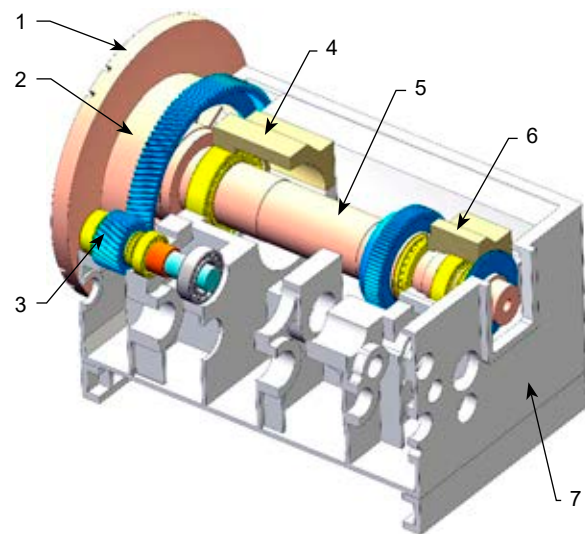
The headstock of HPL: 1 – chuck (rotary table in effect), 2 – chuck areas convenient for backing, 3 – driving toothed wheels, 4 – front spindle rest, 5 – spindle, 6 – rear spindle rest, 7 – casing
